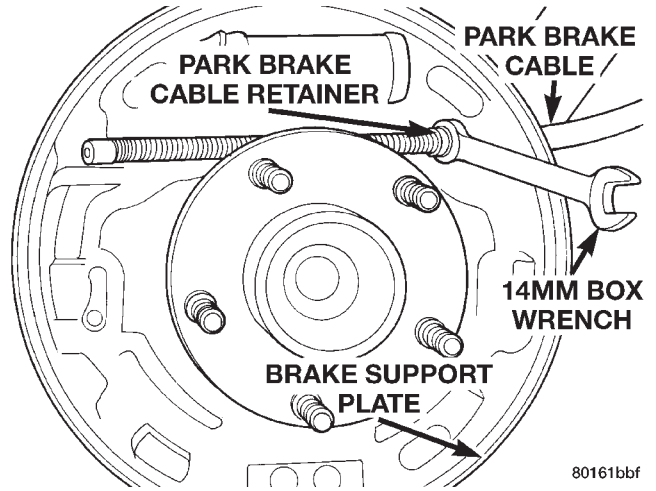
Removing Park Brake Cable From Brake Support Plate
